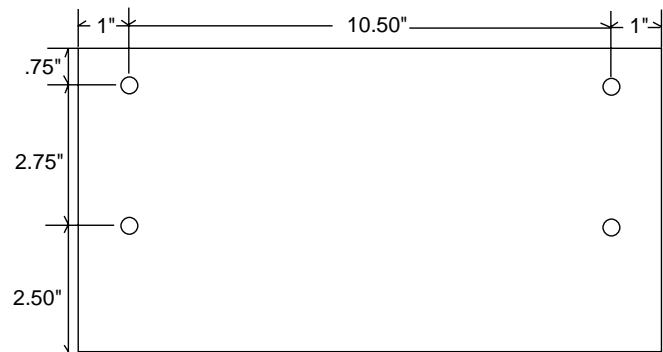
Mounting Dimensions - Flowmeter/Operator's Panel - 2 Torch
